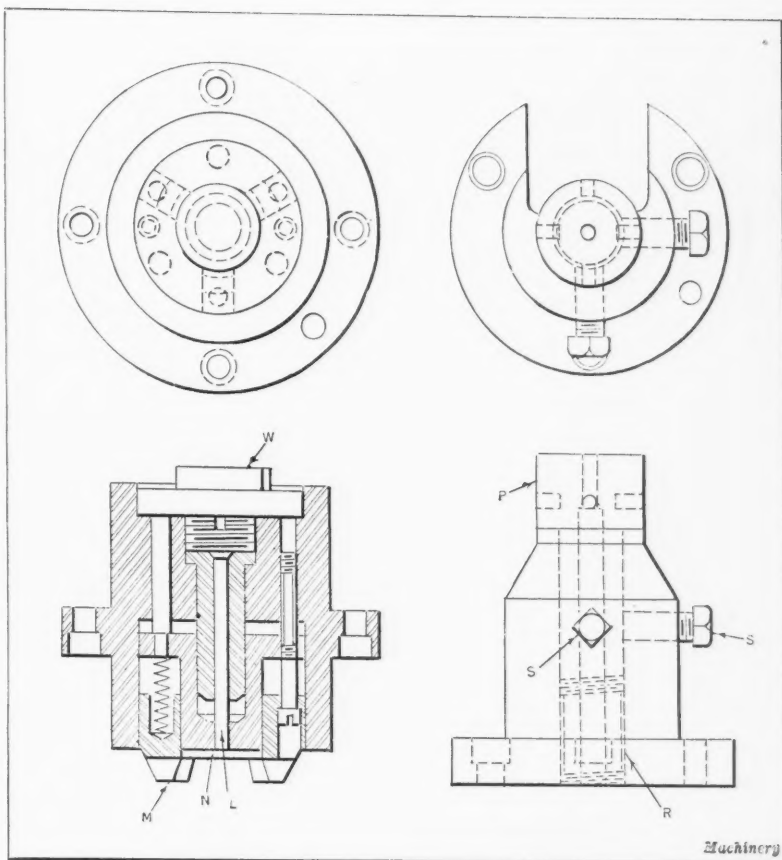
Work-centering Punch and Die Members used in piercing Shaft Hole in Gear
